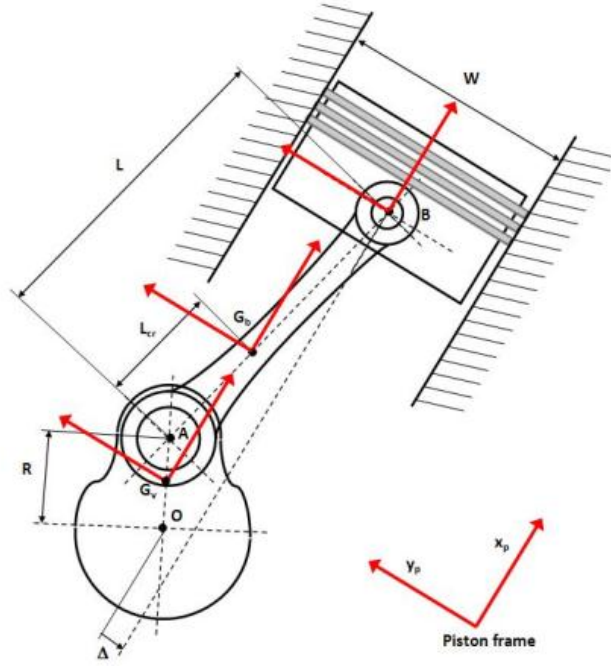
Piston, connecting-rod and crank throw assembly schematic.
